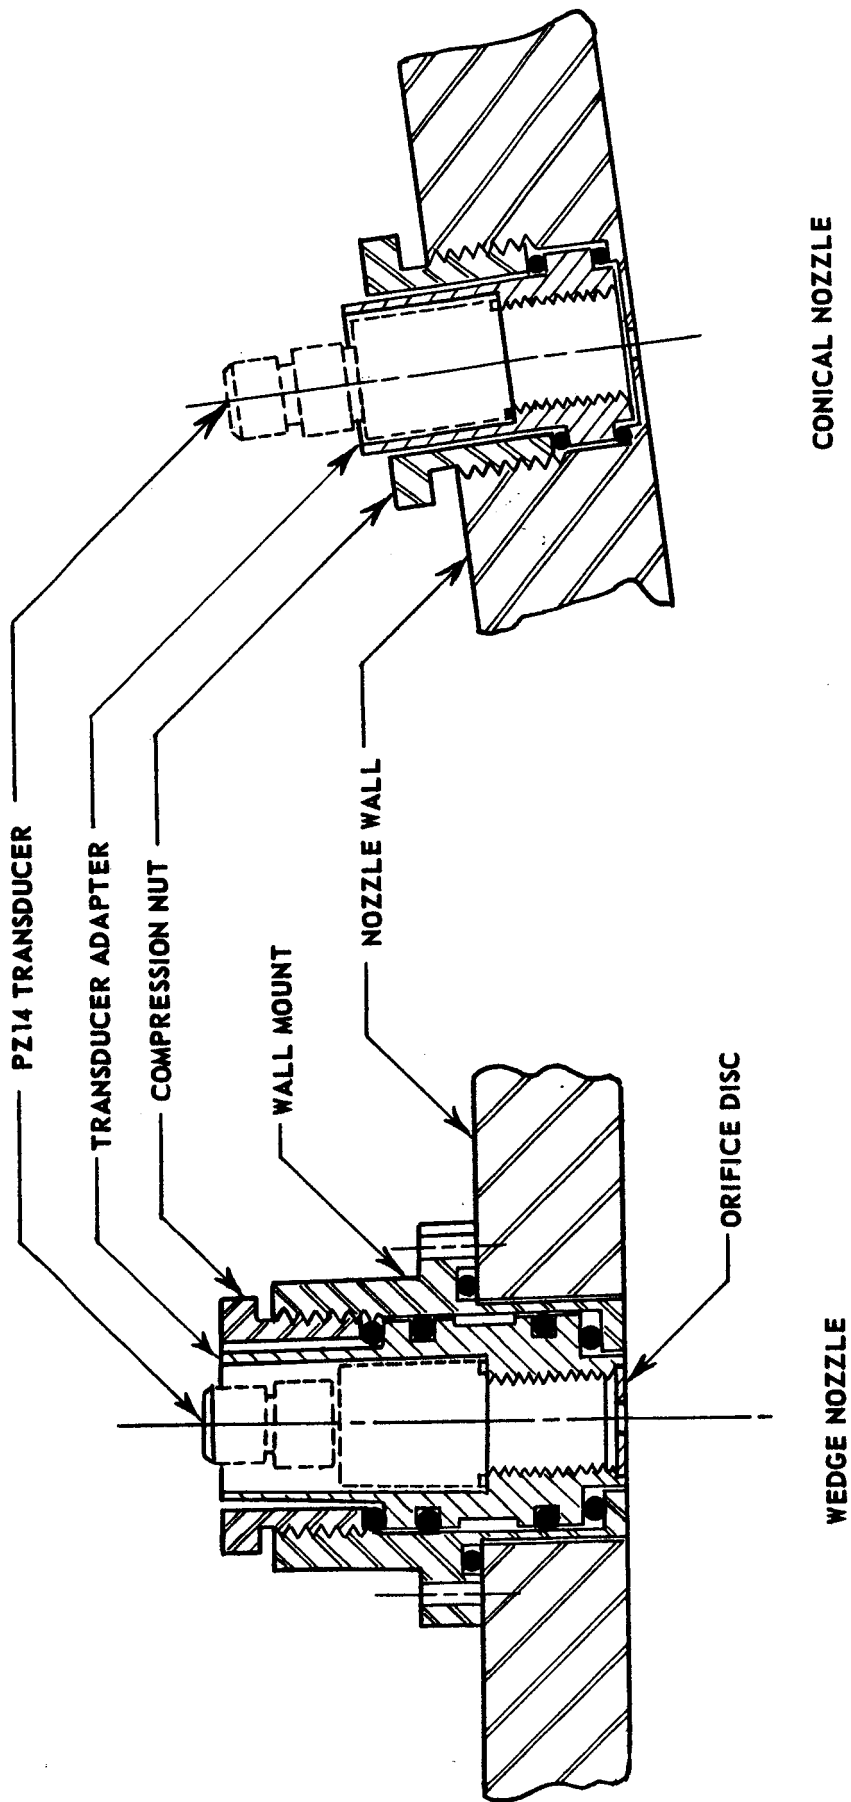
SCHEMATIC OF PRESSURE TRANSDUCER SHOCK MOUNTINGS USED FOR THE 15° WEDGE AND CONICAL NOZZLES
